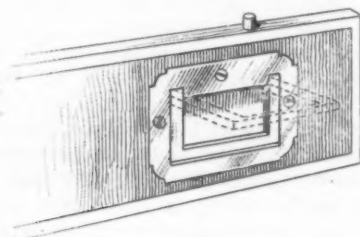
Flush Drawer Pull, Used on Drawers Behind Sample Boards.
